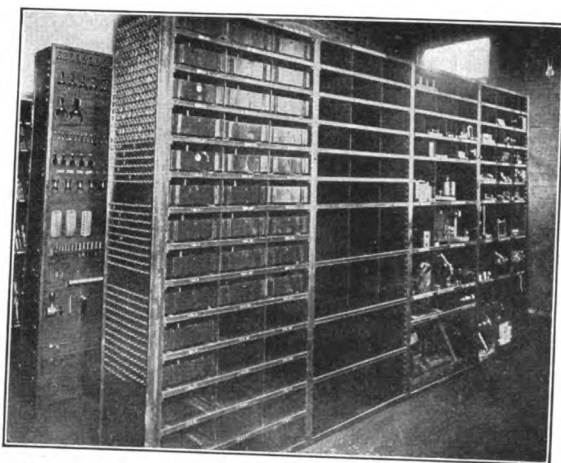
ADJUSTABLE STORAGE CASES FOR STORING JIGS AND FIXTURES
